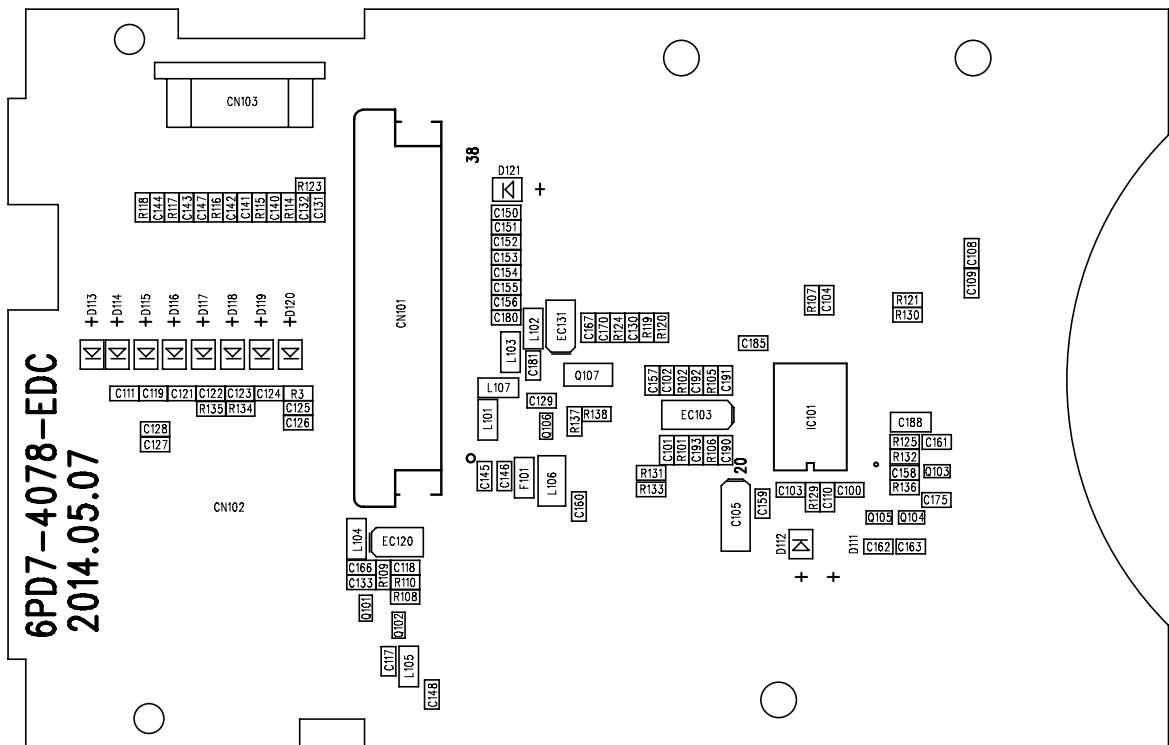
TP660 Main Board Bottom Side PCB View (136-174MHz)
